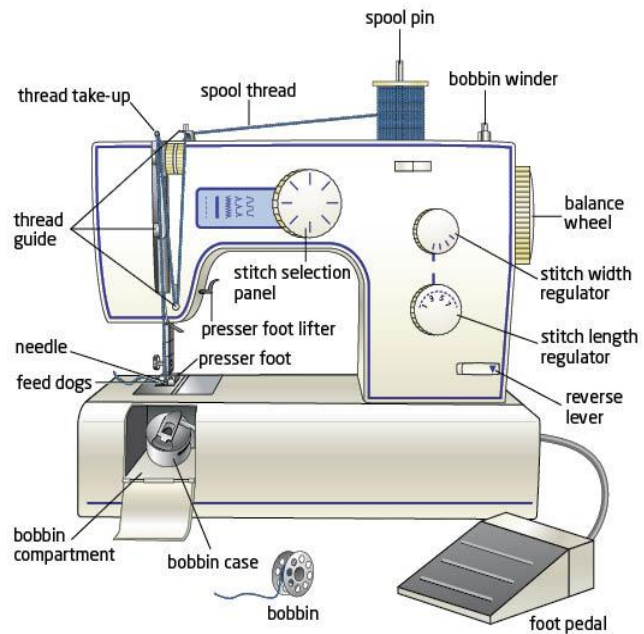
Different Parts of Sewing m/c (Upper Part)
